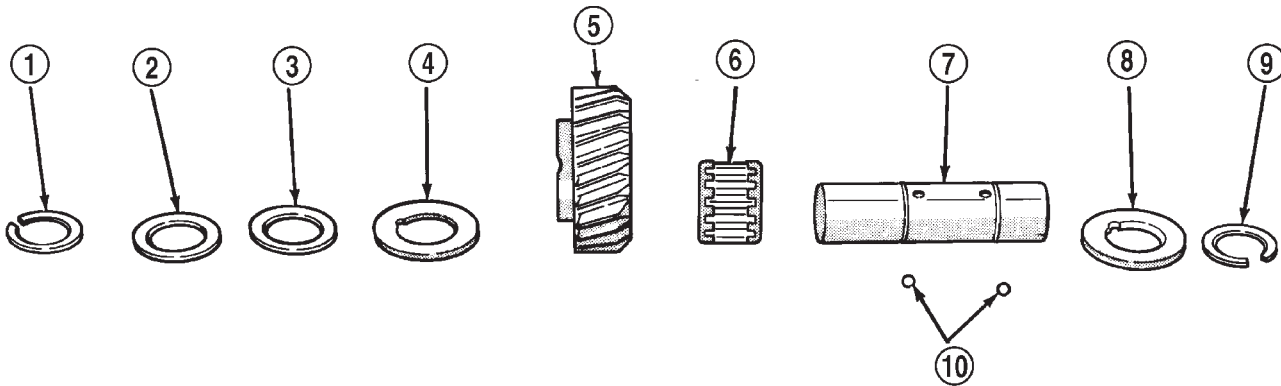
REVERSE GEAR AND NEEDLE BEARING
